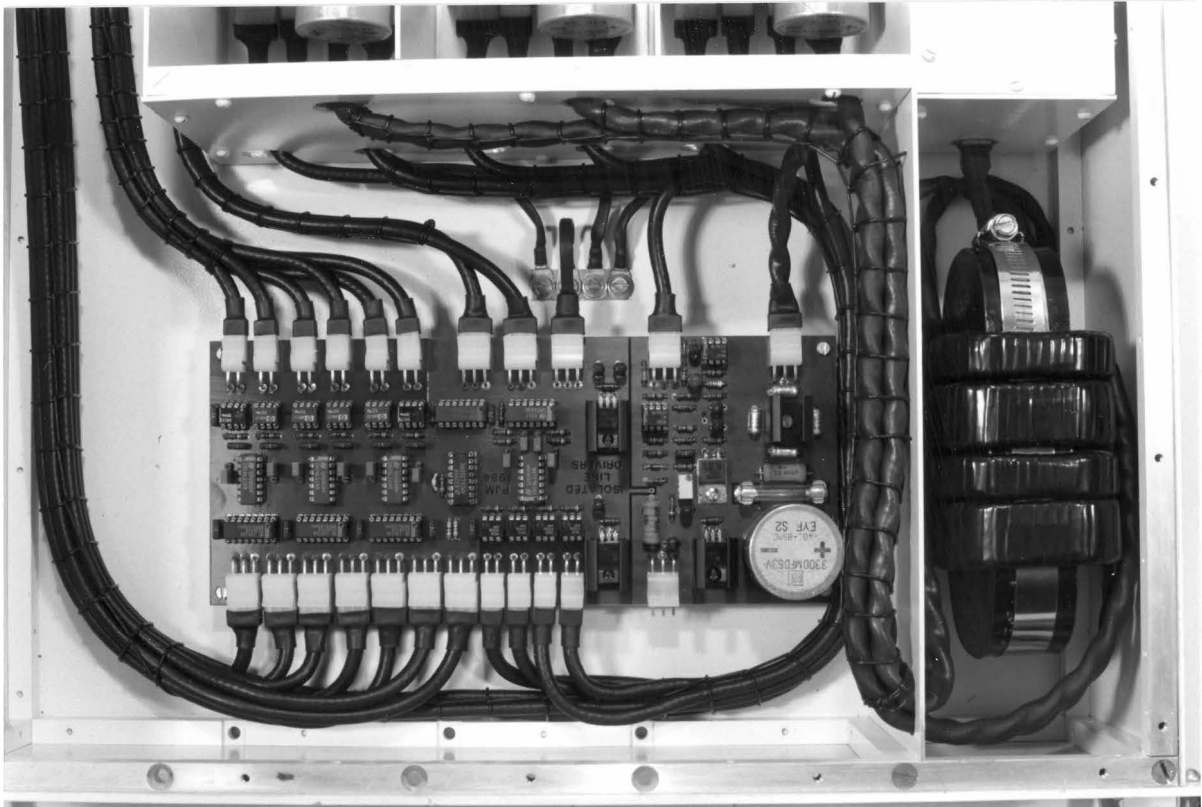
An isolated line driver board and triple-shielded transformer.
